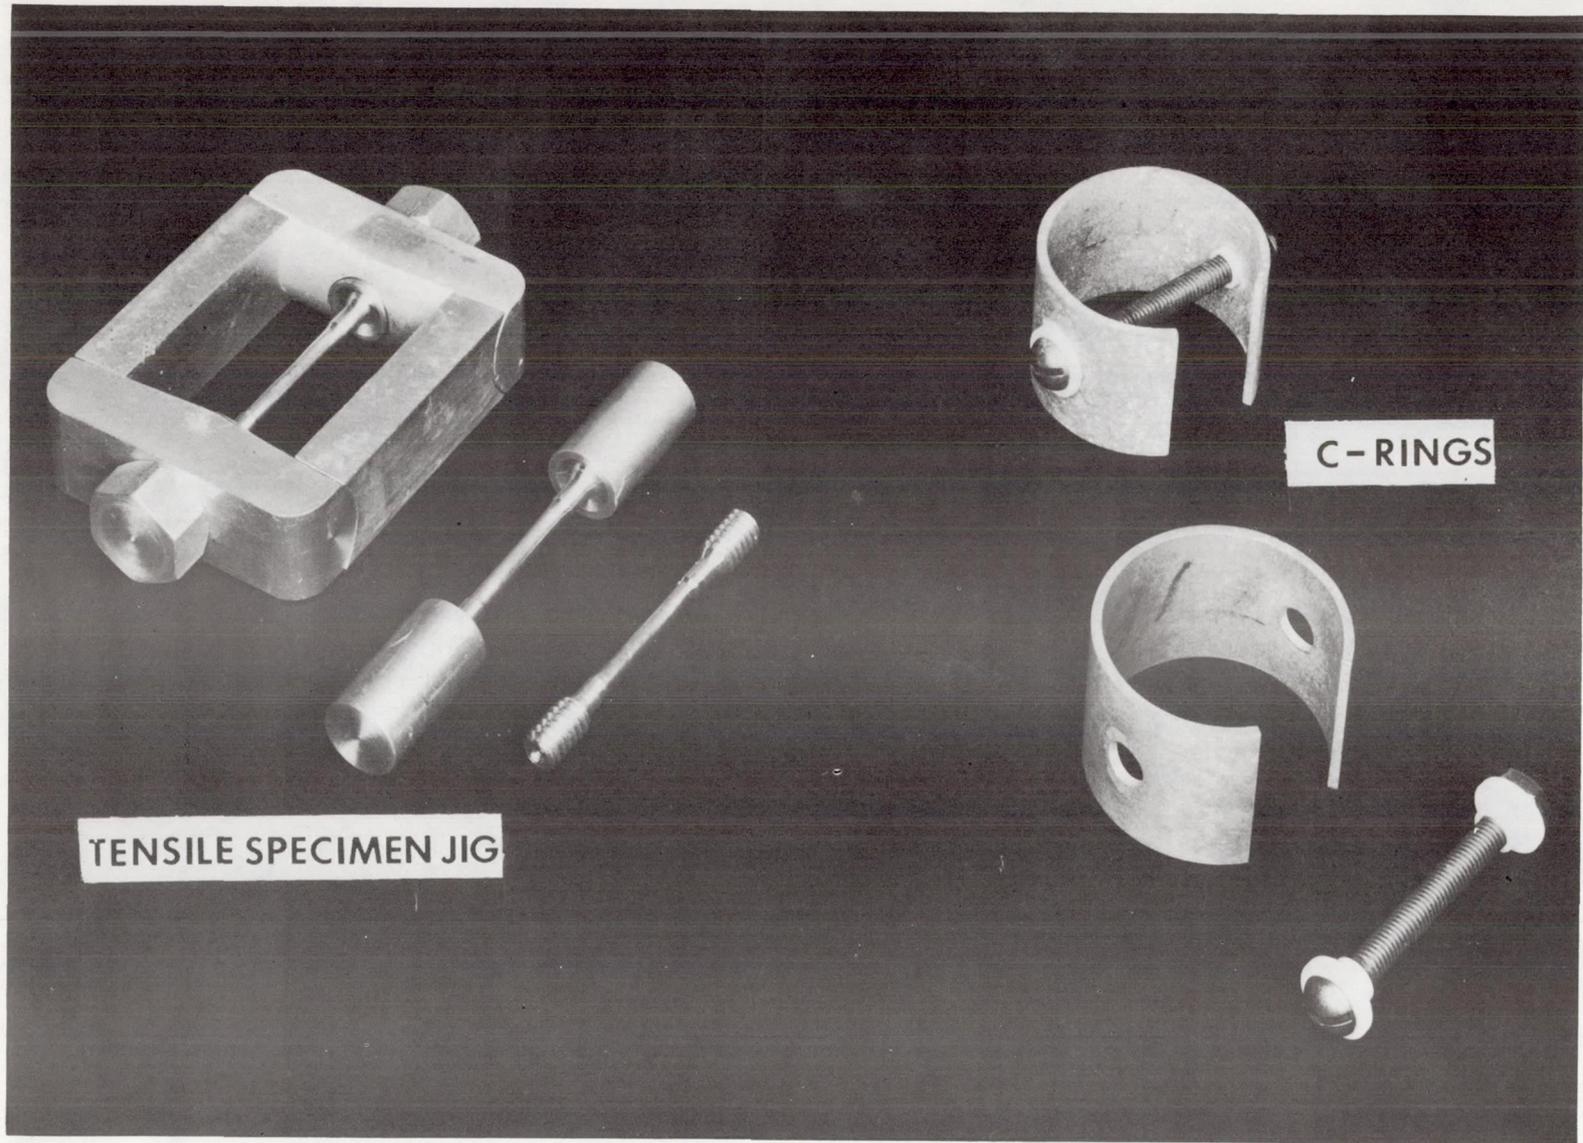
ROUND TENSILE AND C-RING TYPE STRESS CORROSION TEST SPECIMENS
